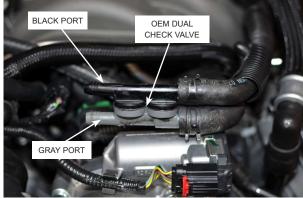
f: Dual Check Valve Assembly (Hoses Removed)
